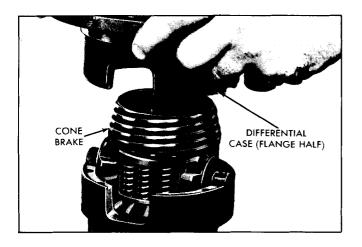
B-16 Installing Flange Half of Differential Case - Two or Four Pinion
